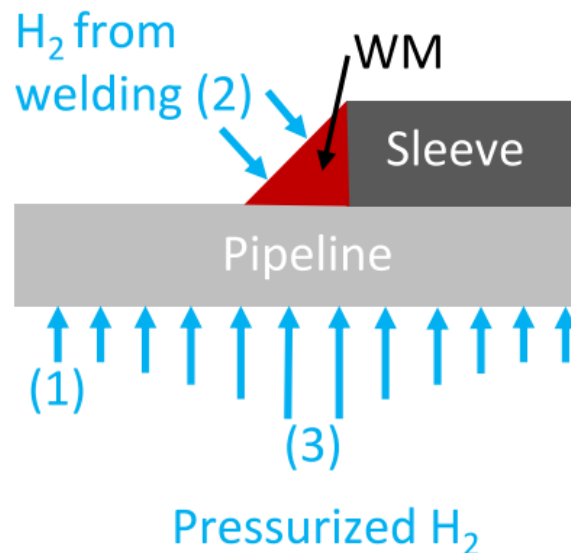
Hydrogen sources for in-service welding of sleeve installation. (1) hydrogen from pre-charged pipeline due to service, (2) during welding (consumables), (3) the additional hydrogen uptake from heated pipe surface. [16]
